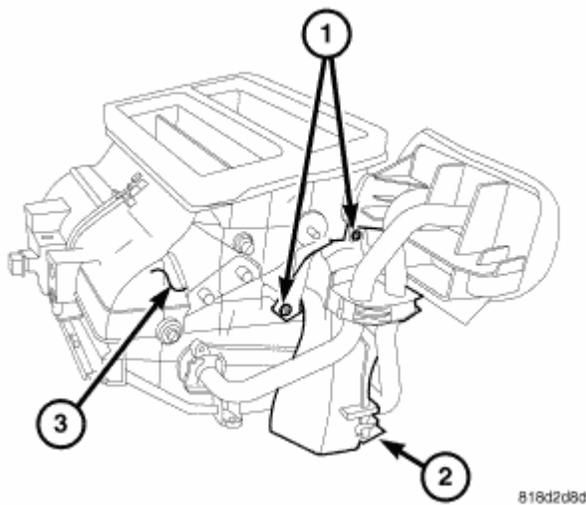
Removing/Installing Two Screws That Secure Upper Front Passenger Side Floor Duct To Passenger Side Of Air Distribution Housing And Upper Duct
